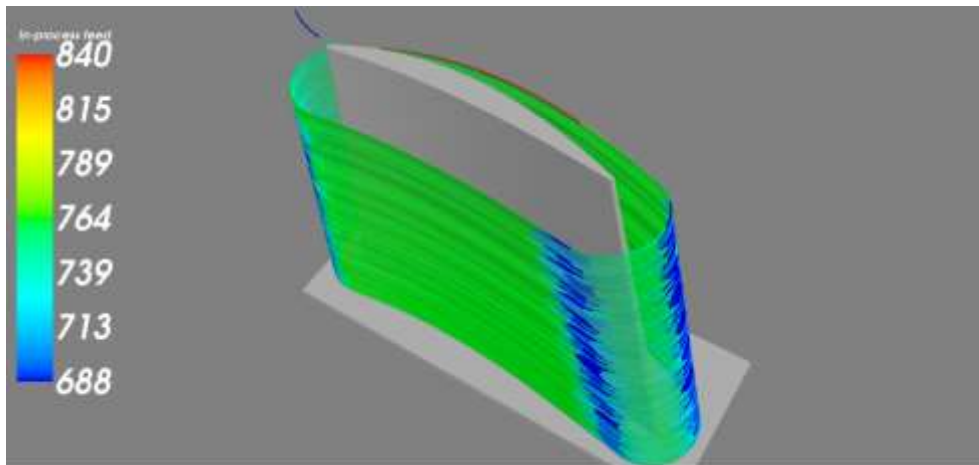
Actual tool path and feed [mm/min] from the machining process.
